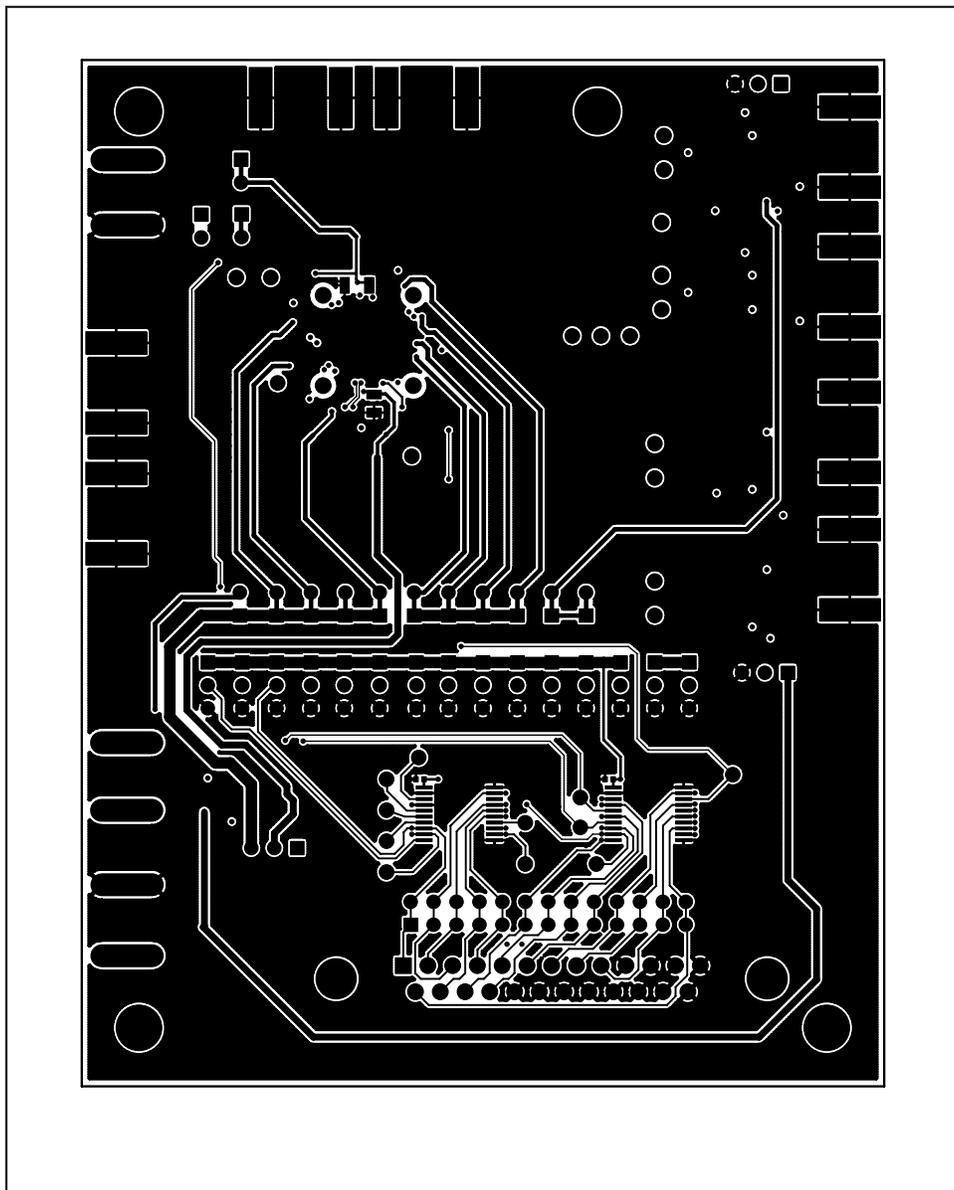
MAX2830 EV Kit PCB Layout—Solder Side
